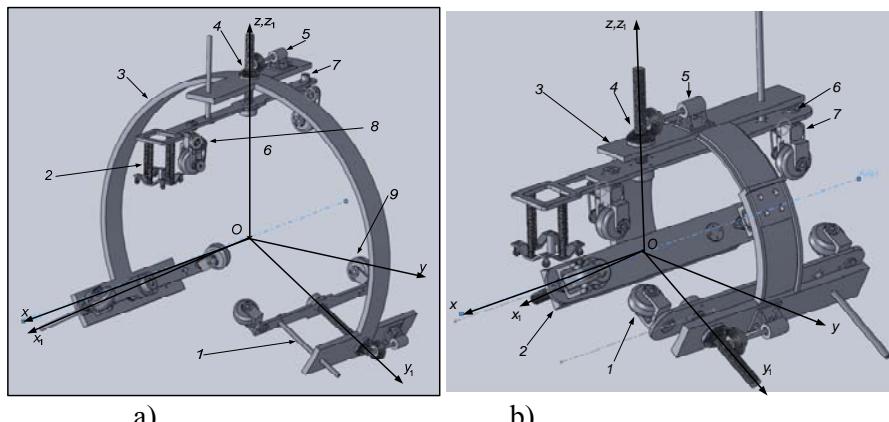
a) Ring frame positioning system, 1-handle, 2-subassembly supporting the "feeler" 3-ring framework, 4-drive mechanism and radial positioning, 5 - drive system, 7-pivoting motor, 8-wheel driving system, 9-running wheel system. b) Adjustable Ring Frame system, 1, 2 - wheel drive, 3-radial positioning positioning unit, 4 - radial positioning drive and positioning mechanism; 5 - radial positioning engine, 6-swivel motor, 7-running -driving system.
